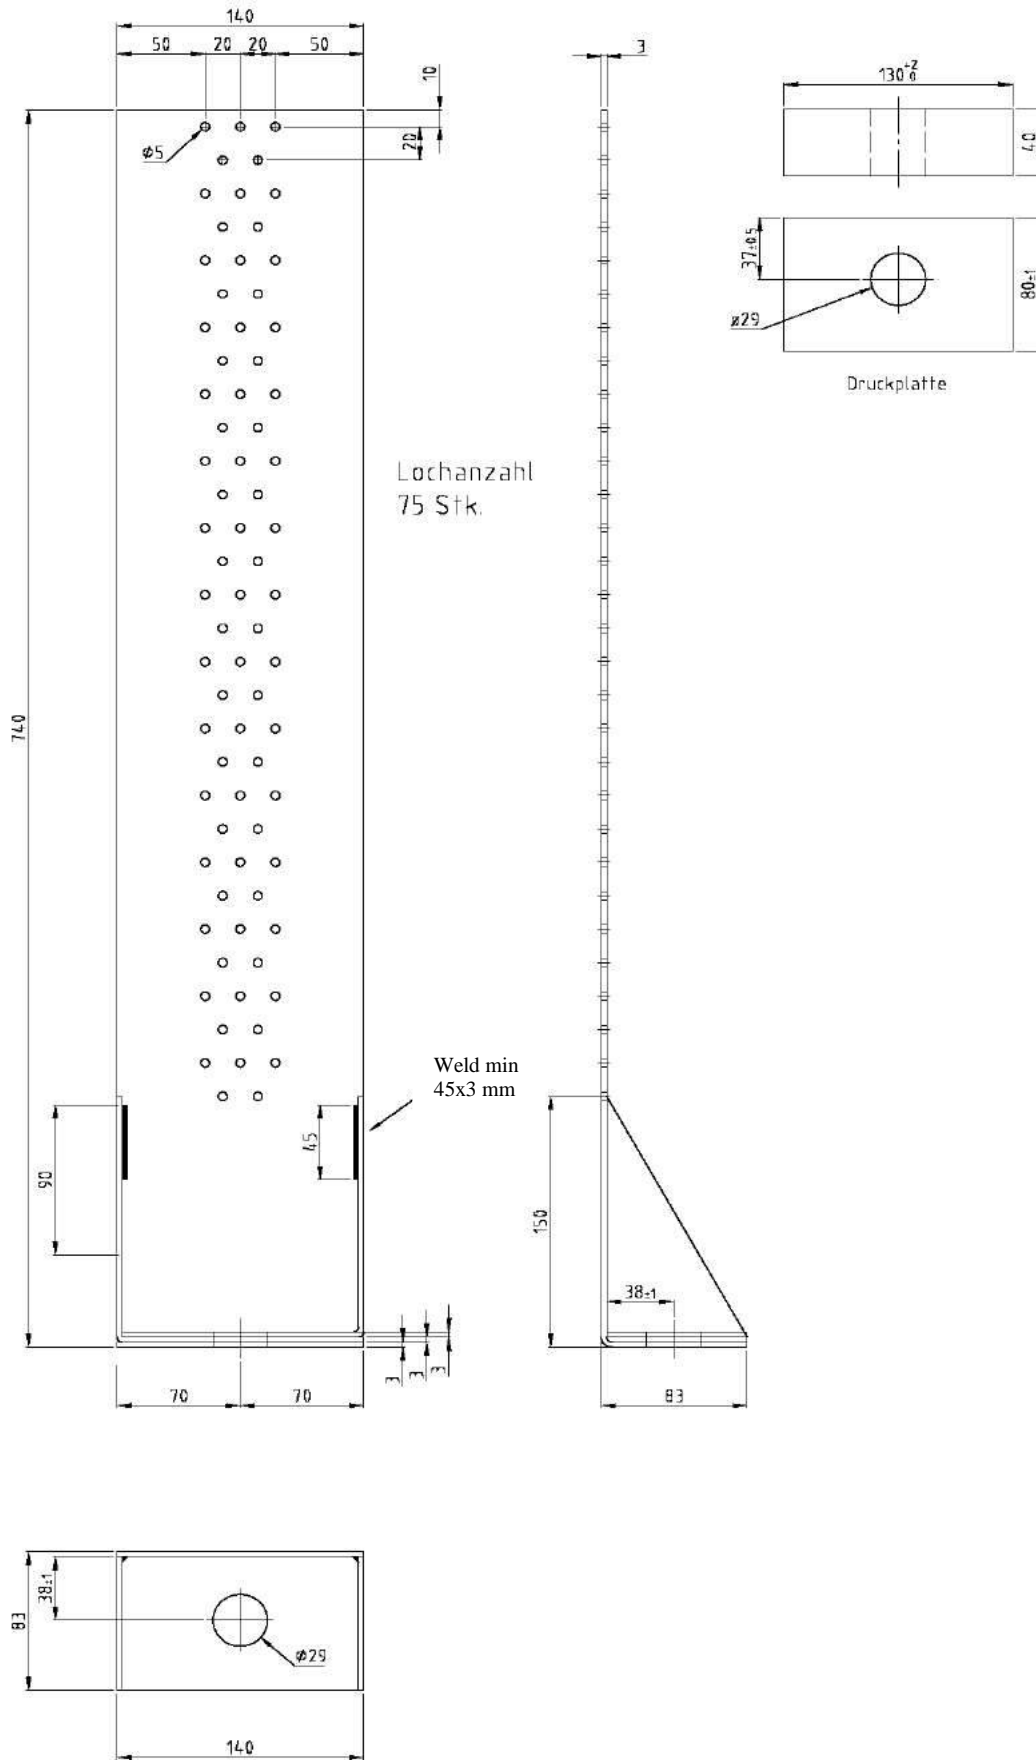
Dimensions of type WHT740 (drawing with washer 80x130x40)
